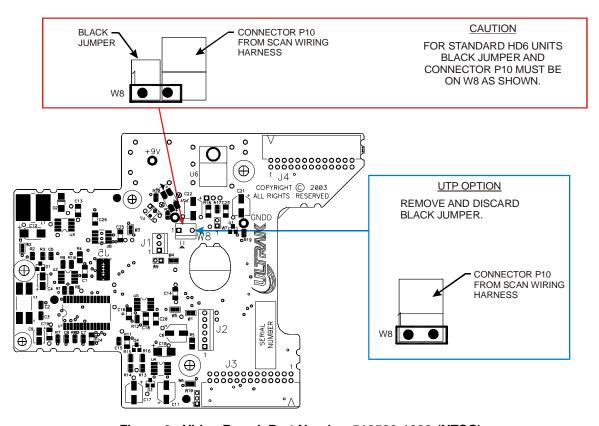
Video Board, Part Number 519539-1020 (NTSC)
